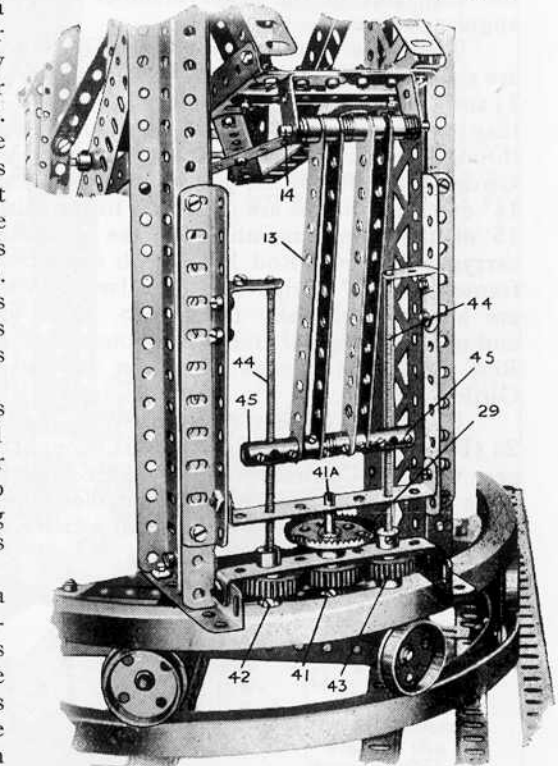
View of the screw Luffing Gear, showing links, etc.
